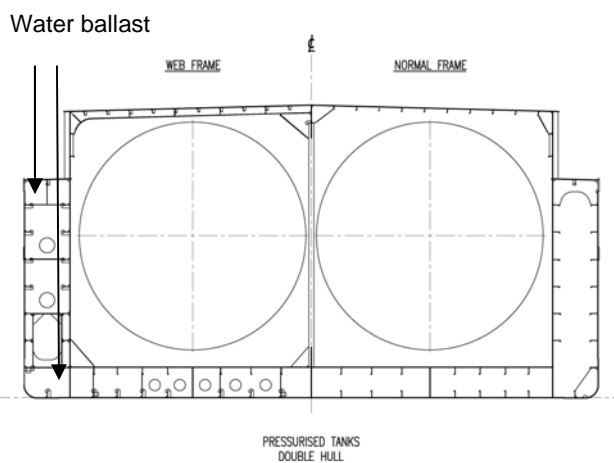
Widely spread inland gas tanker-type, fully pressurised Double hull and double bottom
